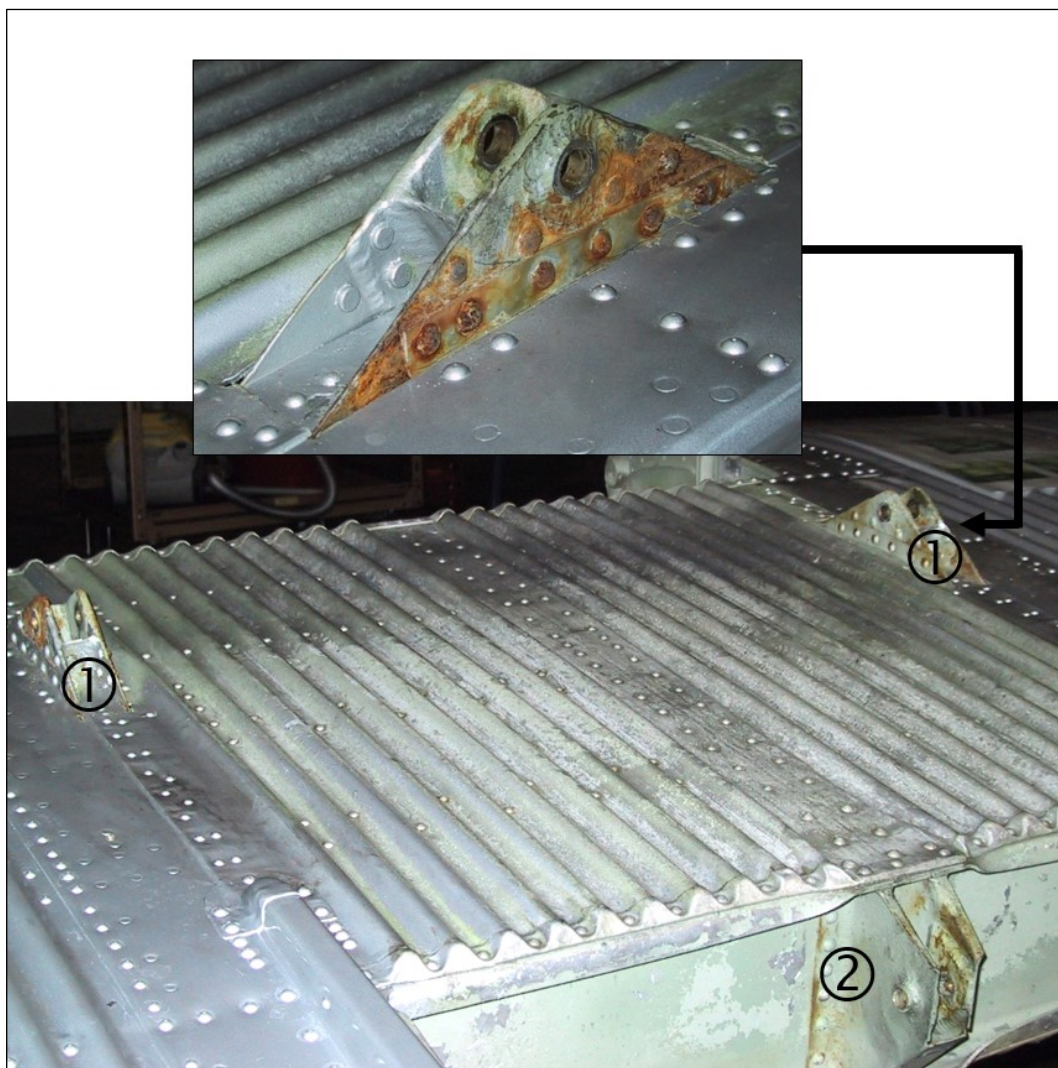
Horizontal stabiliser with severely corroded joints (1), bearing bracket (2) and panelling. Photograph provided by Ju-Air.
